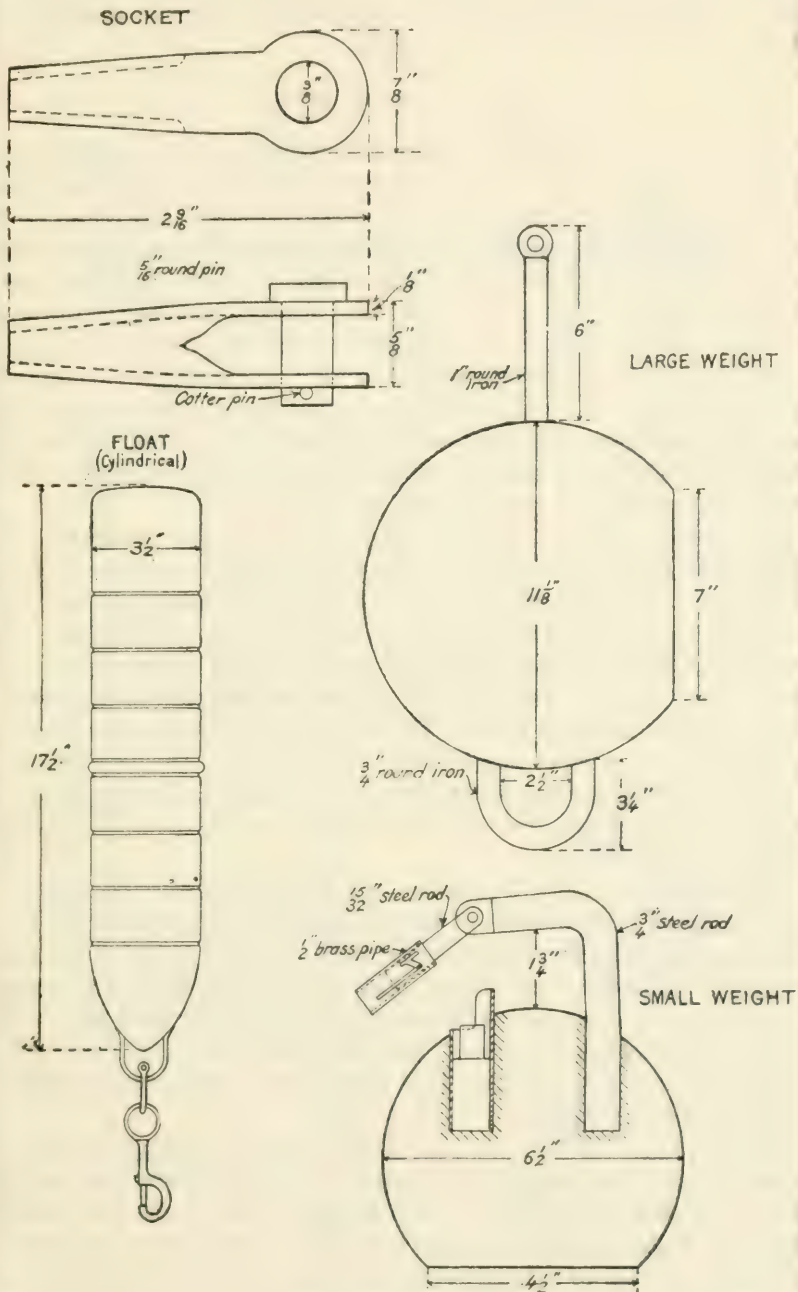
SOCKET, FLOAT, LARGE AND SMALL WEIGHT.
